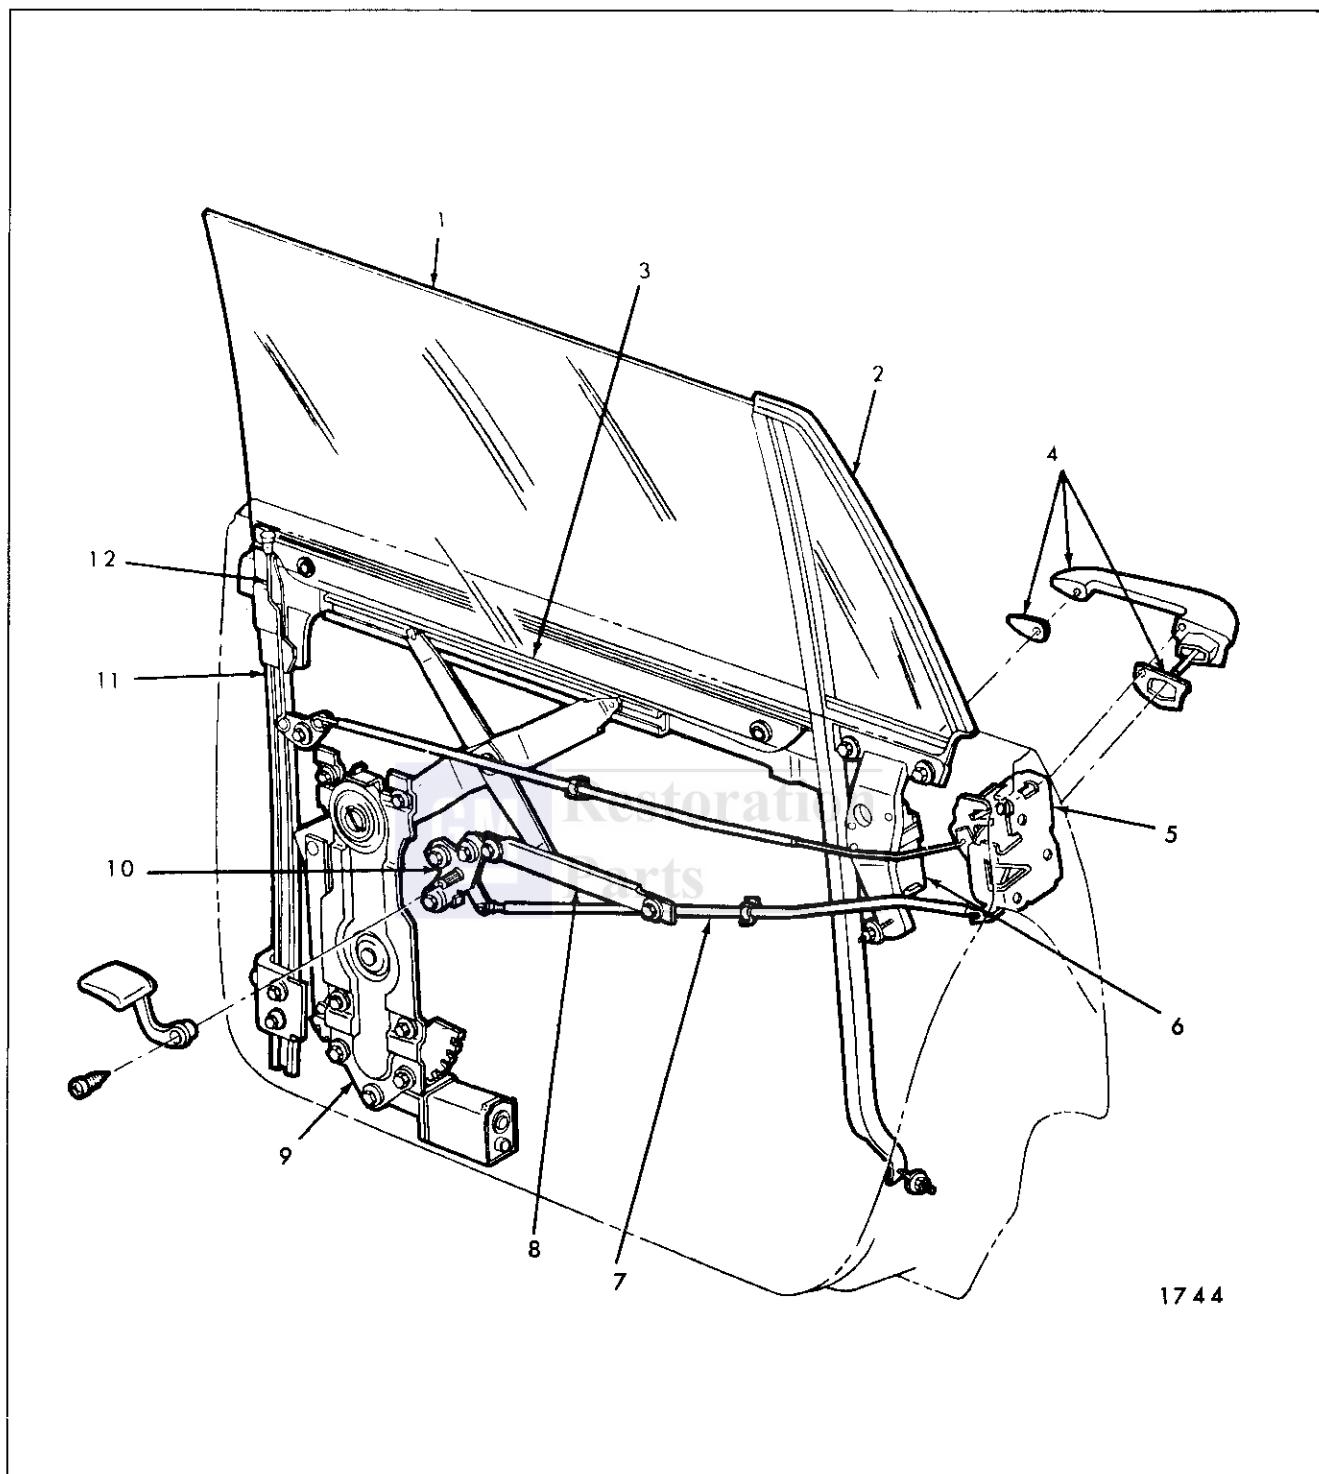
Rear Door Hardware - 68069 - 68169 Styles
